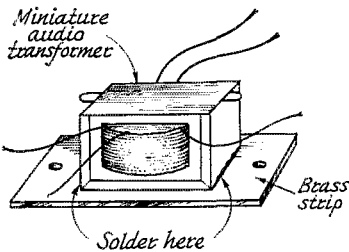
Miniature printed-circuit-type transformer modified for direct chassis mounting.
